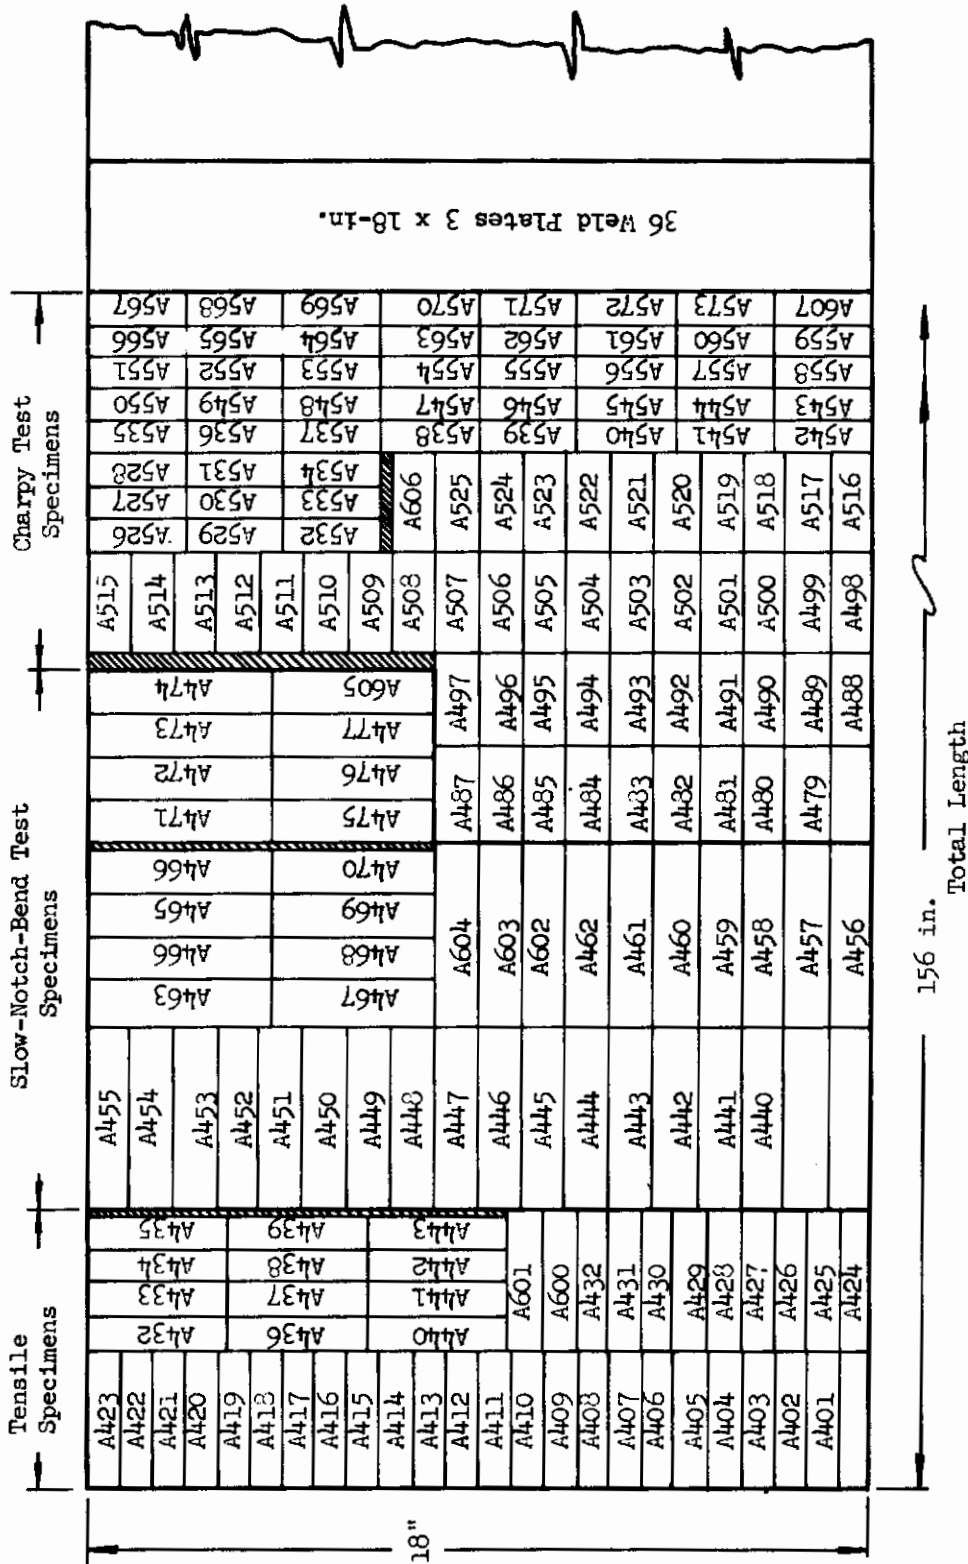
Location of Test Specimens in 3/4-In.-Thick 18% Nickel Maraging Steel Plate, Heat 24158
